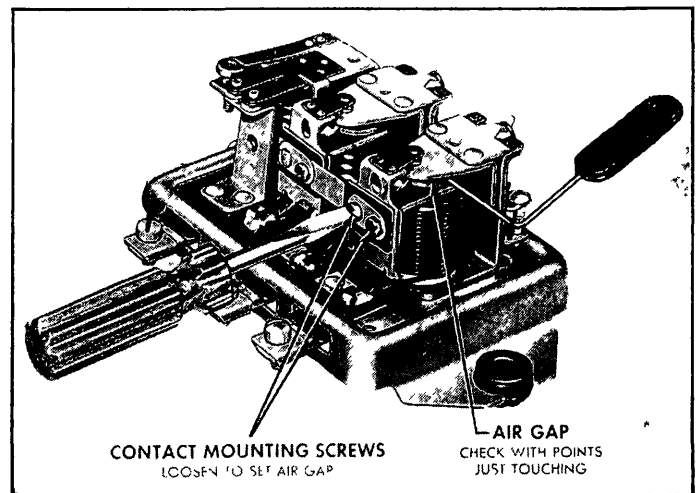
Adjusting voltage regulator armature air gap on Delco-Remy single core regulators with screw adjustment
